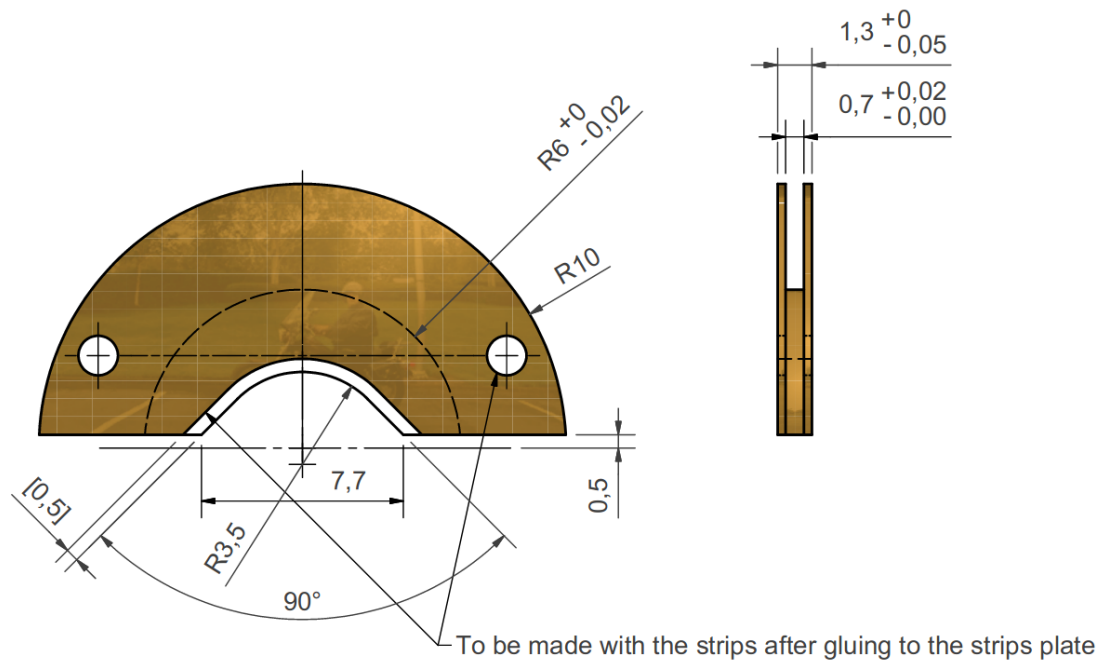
A drawing of the V-shaped brass insert used in the cathode boards of an sTGC [21].
